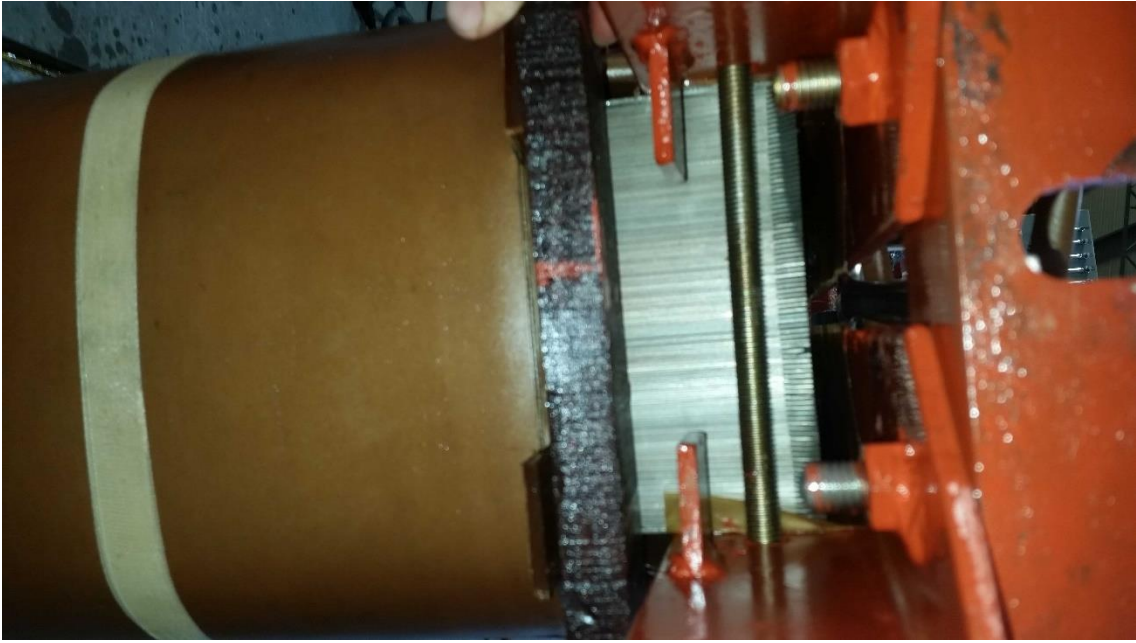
East side windings outer coil packer prior to removal once core clamping structure loosened and shifted upwards.
